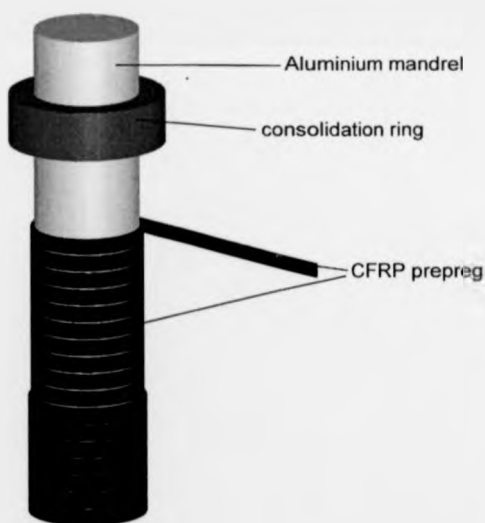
Schematic layout of the manufacturing process used for tubular specimens.
